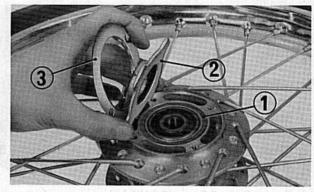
(1) O-ring (2) Gear box retainer (3) Retainer cover
